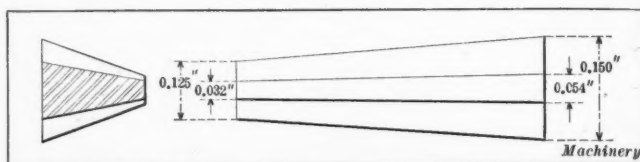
Enlarged View of Part of Bayonet between Sections A and B, Fig. 1
